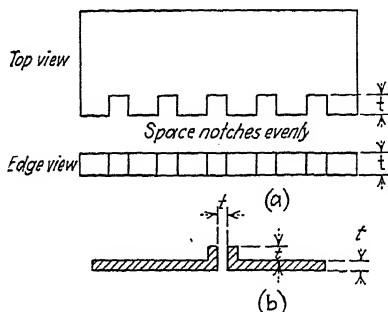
(a) Notched plate for aluminum over  $\frac{1}{4}$  in. thick; (b) flanged butt joint for aluminum plate of sheet under  $\frac{1}{8}$  in. in thickness. No filler rod required.
